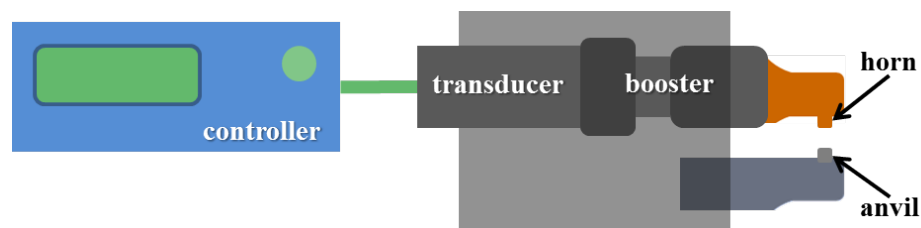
A typical ultrasonic metal welding system (Shao et al., 2013)
